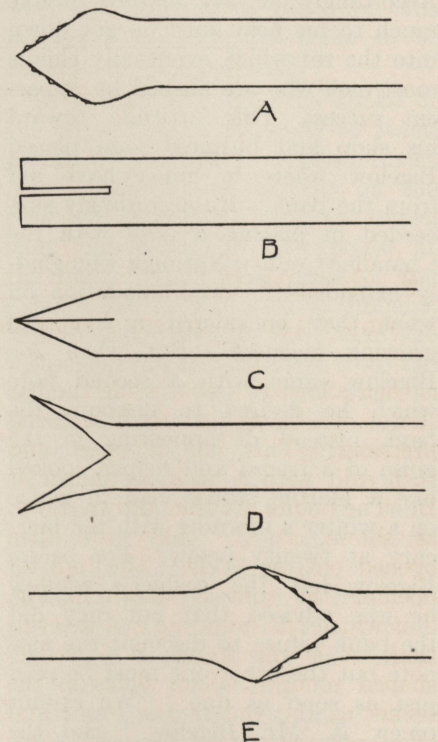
BOTH ENDS ARE UPSET AND PREPARED FOR WELDING
